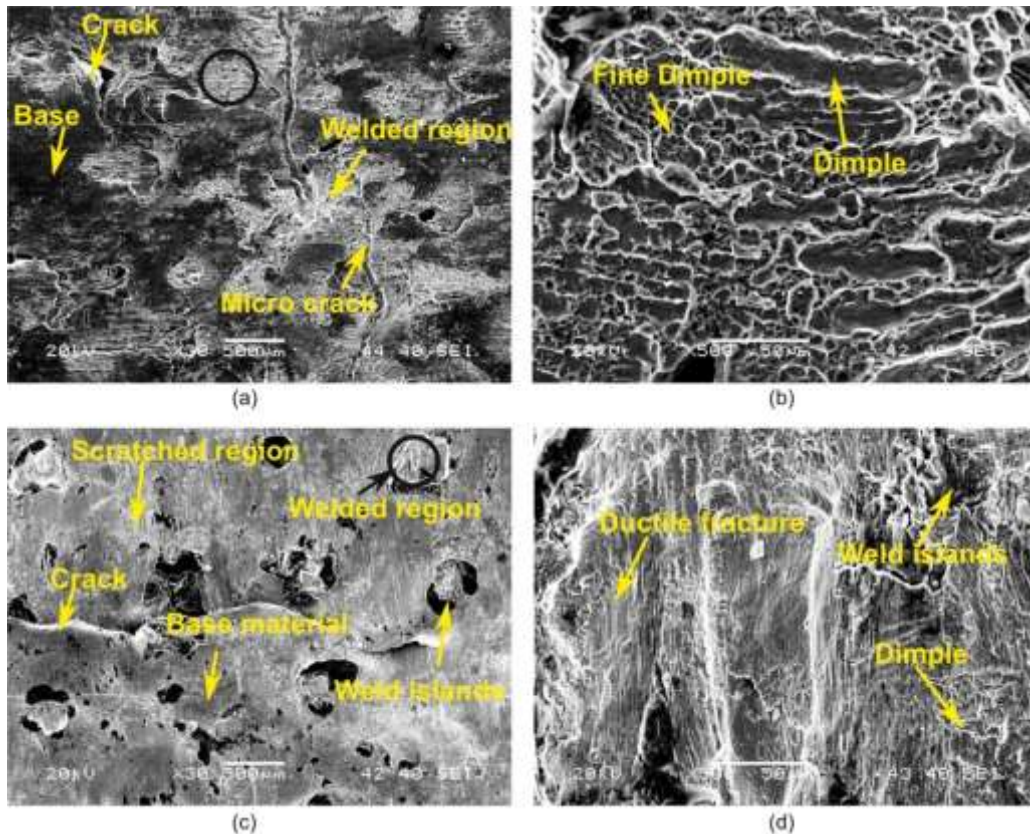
Fractured surfaces of ultrasonically welded specimens in lubricating surface condition (a) Al side surface with 30X zoom; (b) Magnified image of a; (c) Cu side surface with 30X zoom; (d) Magnified image of c
